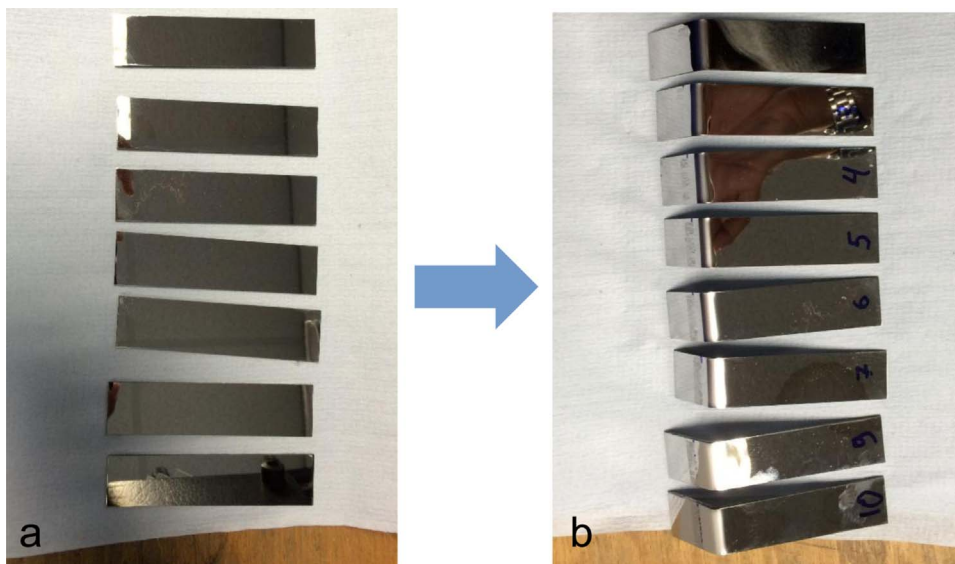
a) Undeformed samples and b) test pieces after flanging. The width of the samples is 20 mm.
